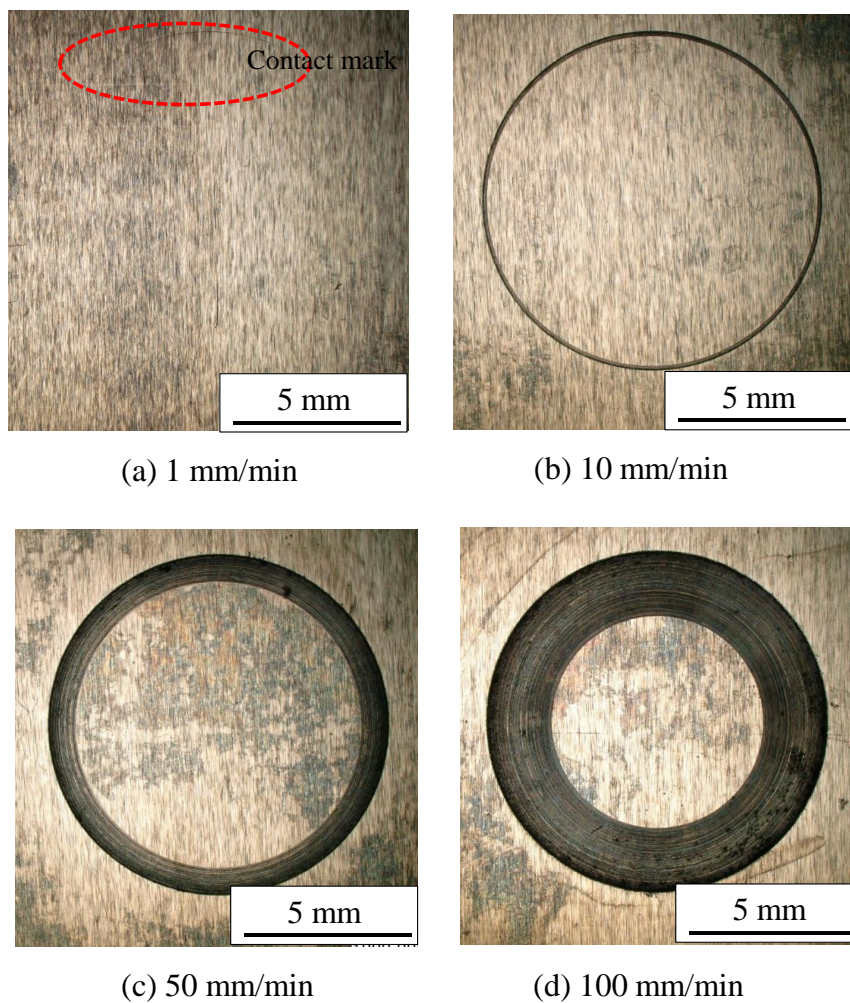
Contact mark on the surface of the workpiece in the Z-axis direction approach.
